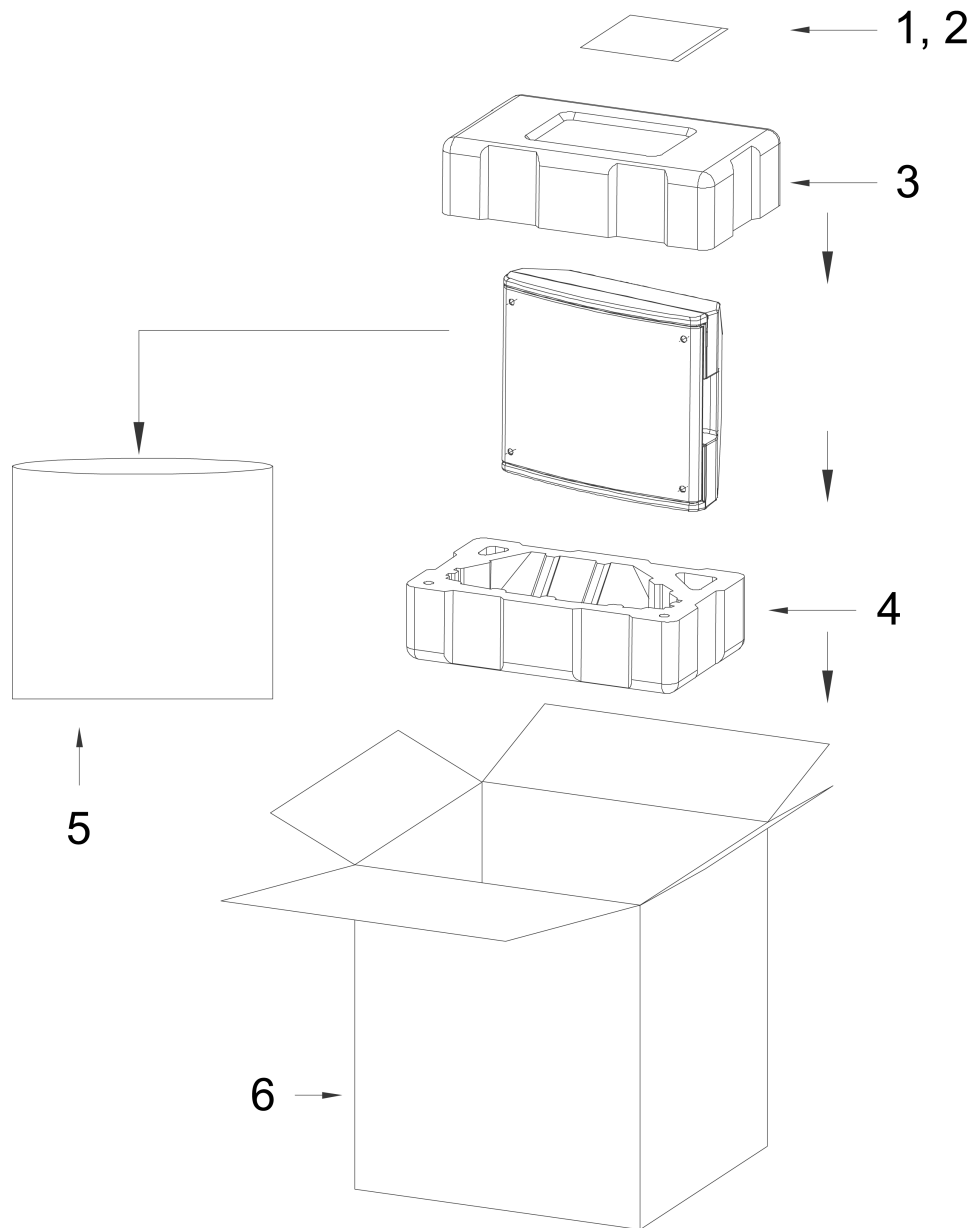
Panaray Model 310M Loudspeaker Packaging View
